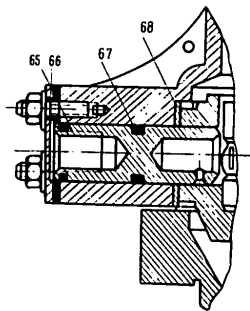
Unit HP-10A. Pin of Wobble Plate Unit
